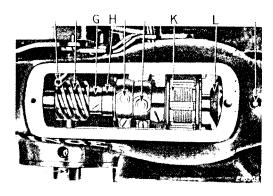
Top View of Machine, Showing Oiling Points Inside of Arm
